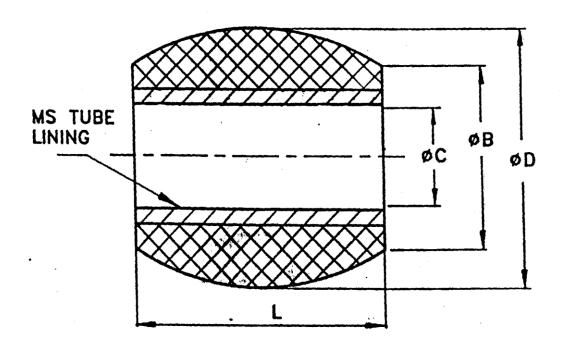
BUSH FOR BUSH PIN TYPE COUPLING
